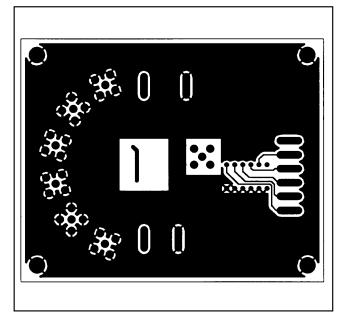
MAX4135 EV Kit PC Board Layout—Solder Side
